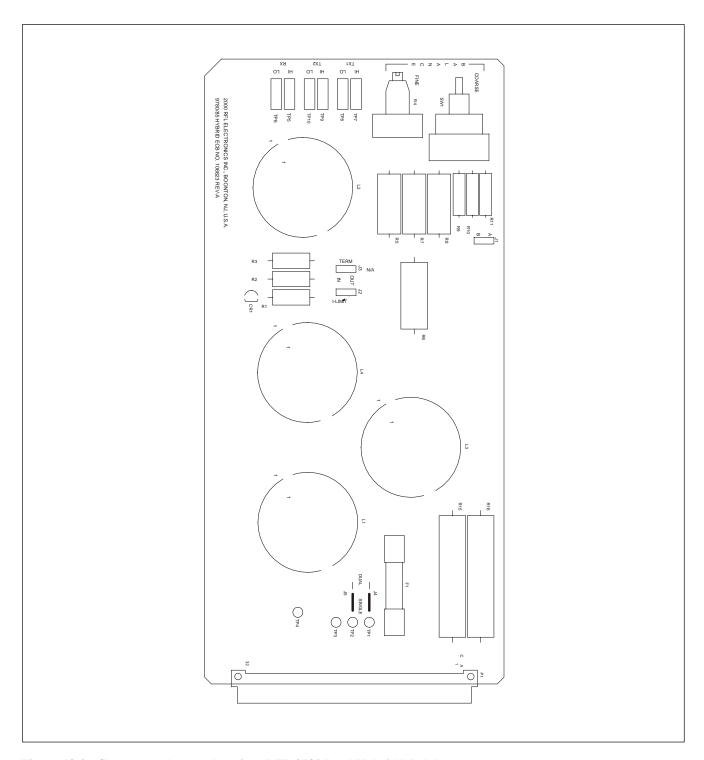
Component locator drawing, RFL 9780 Dual Hybrid Module
